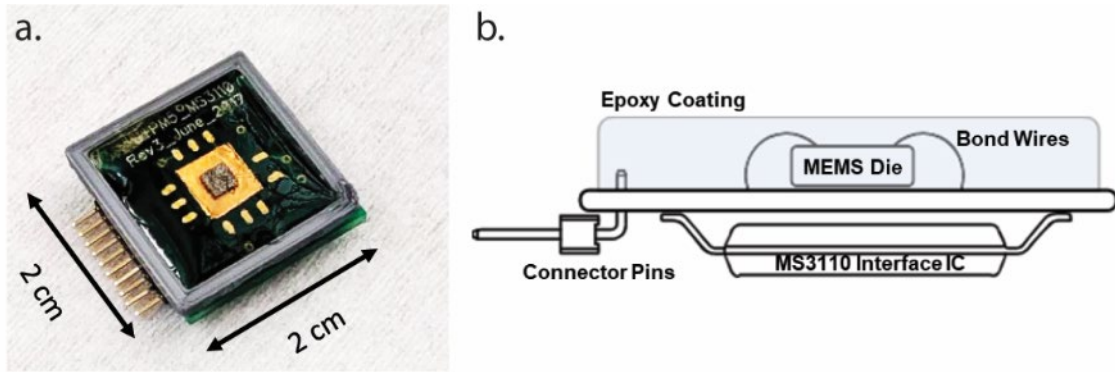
(a) Fabricated and assembled ACM evaluation board on a miniature PCB (2cm x 2cm) with the MEMS die placed on top-side and the interface electronics on the bottom-side of the PCB. (b) Cross-sectional schematic diagram of the PCB demonstrating the location of all components. A protective epoxy layer is placed on top of the MEMS die.
